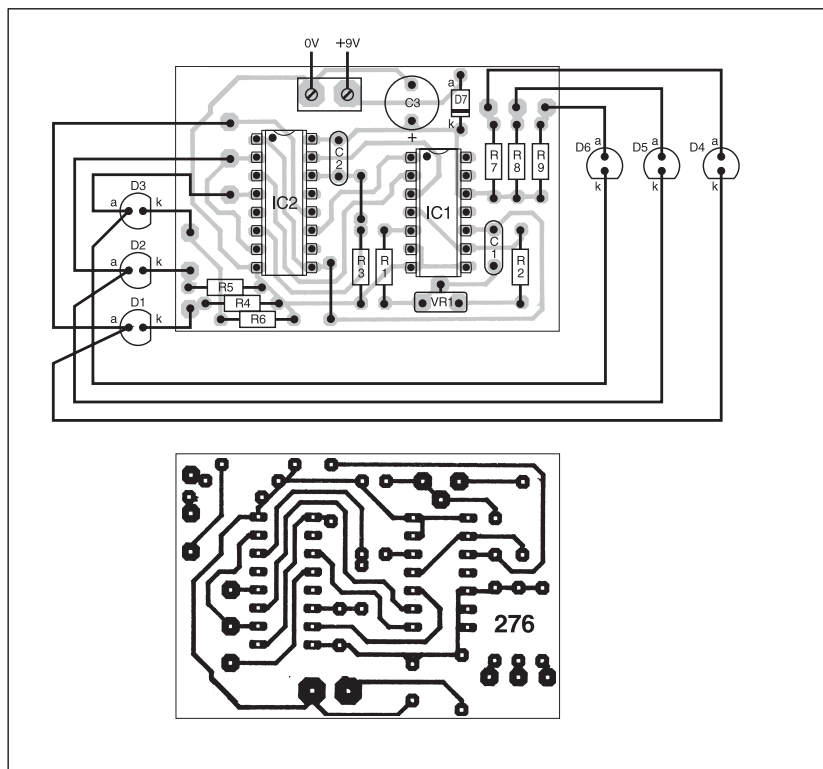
Printed circuit board component layout, interwiring to off-board I.e.d.s and full-size copper foil master.
